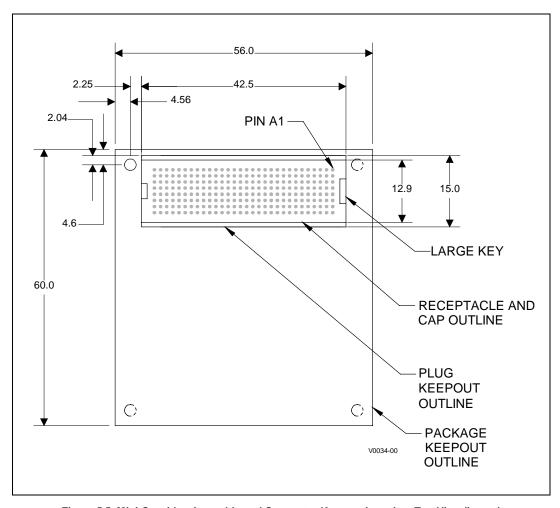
Mini-Cartridge Assembly and Connector Keepout Location, Top View (in mm)
